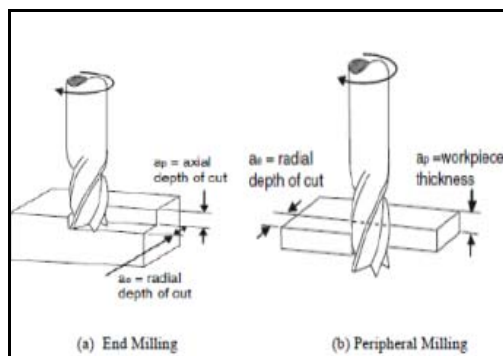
(a) End Milling, (b) Peripheral Milling
